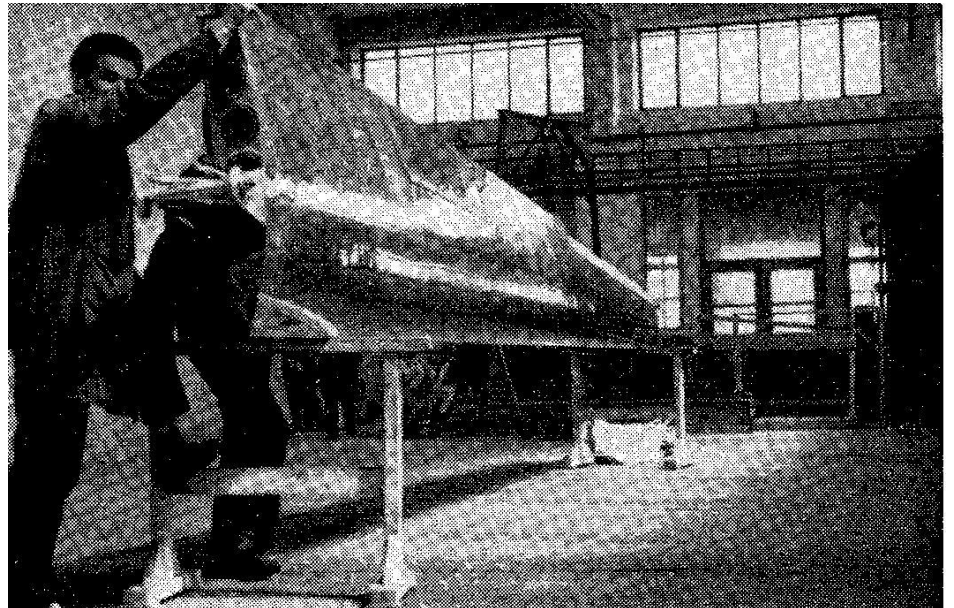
Example of a bonded honeycomb (sandwich) assembly
